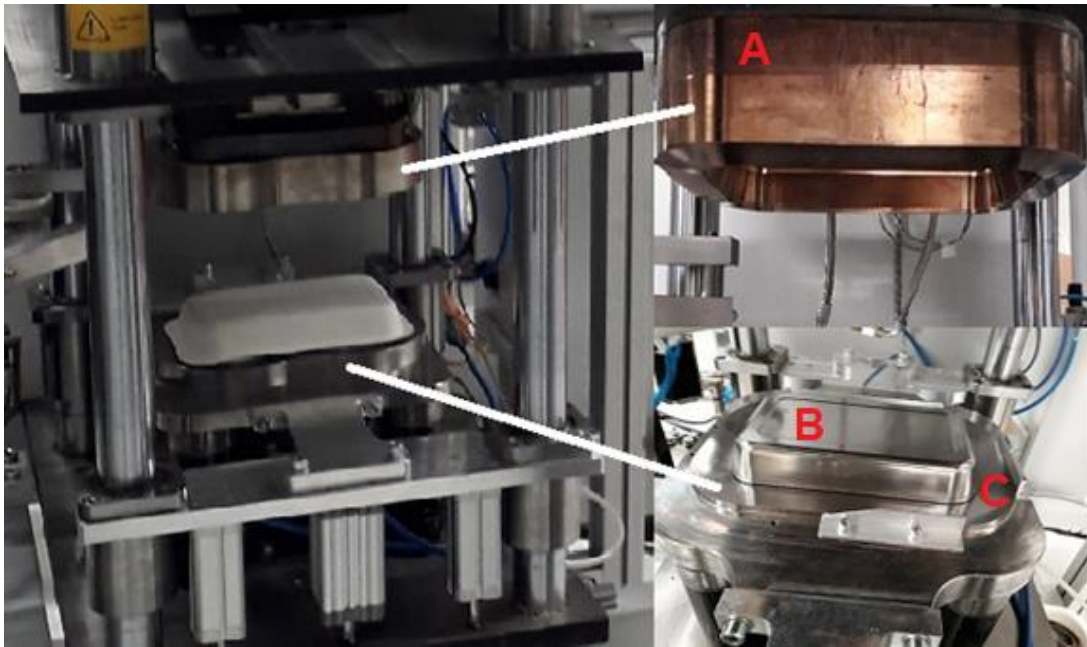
Tray manufacturing apparatus: (A) female tool, (B) male tool, and (C) blank holder
